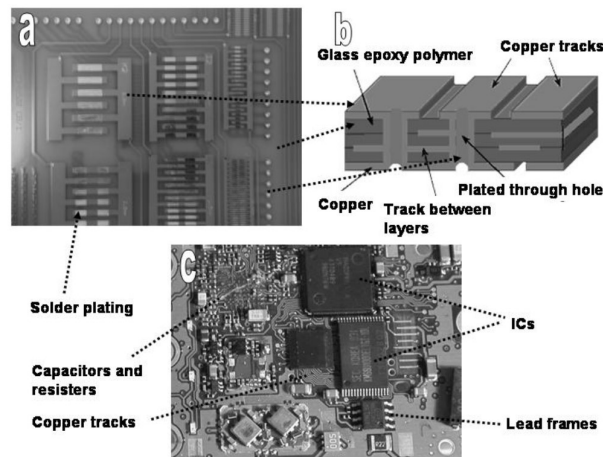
Description of a PCB: (a) PCB with connecting lines, (b) schematic of the cross section of a PCB, and (c) PCB with component mounted on it.
